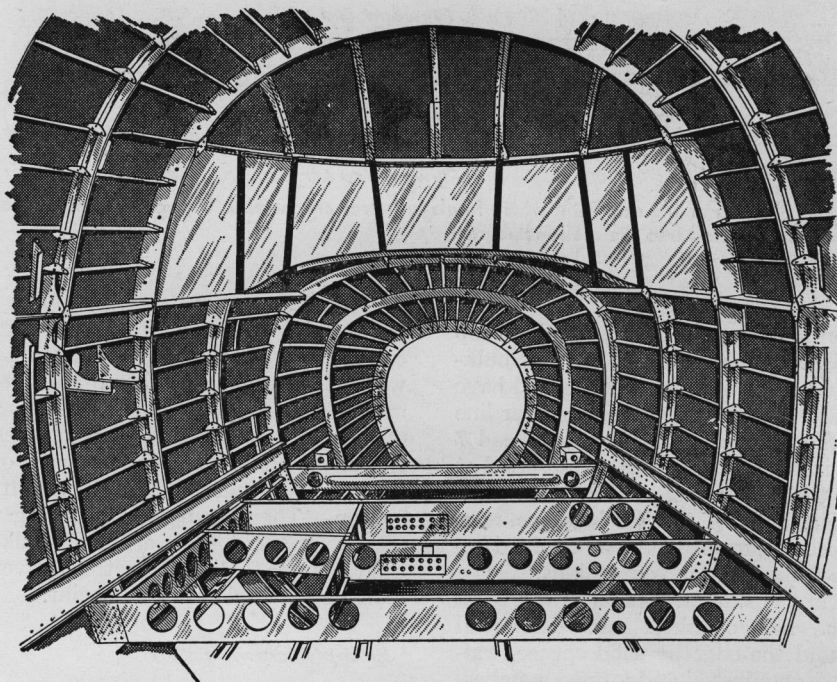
Interior view of a Vickers-Viking 28- to 30-place transport, showing the fuselage construction at the pilots' compartment. Skin attachment is provided by local boundary members riveted to oval frames. The floor beams are of lipped channels with large flanged lightening hobs.
